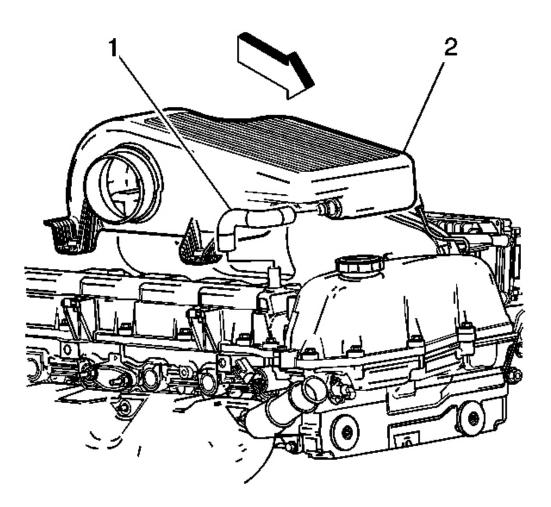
View Of Crankcase Clean Air Hose & Air Cleaner Outlet Resonator Courtesy of GENERAL MOTORS CORP.
